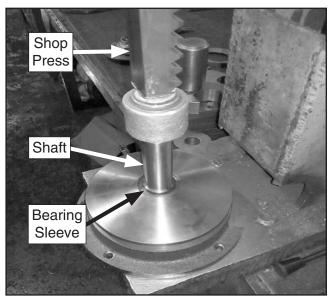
Brake bracket mounted on shop press for removal of shaft, bearing sleeve, and lower pulley.
